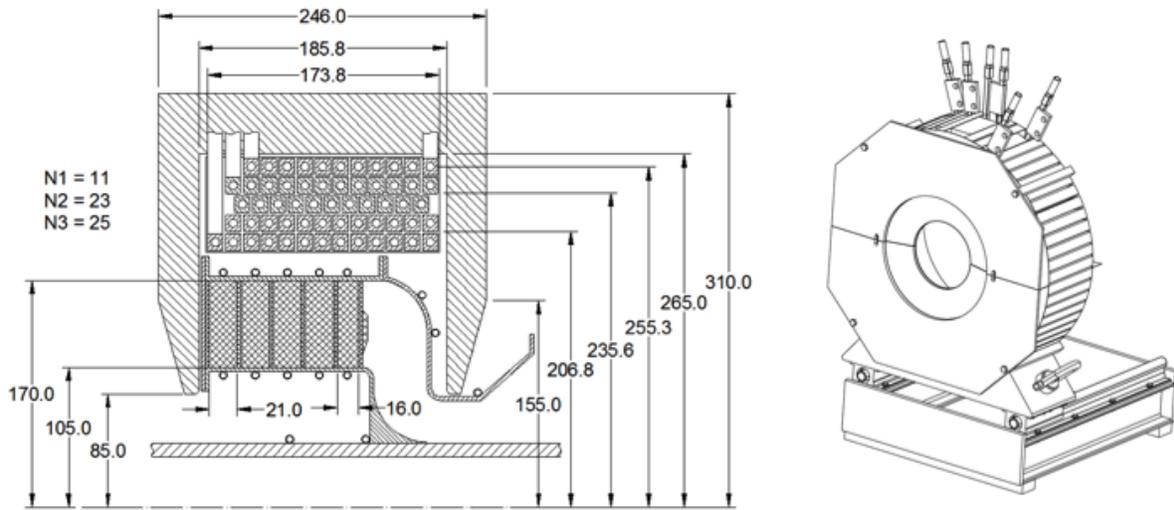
A cross sectional view of the bias solenoid and the tuner. All dimensions are in millimeters.
